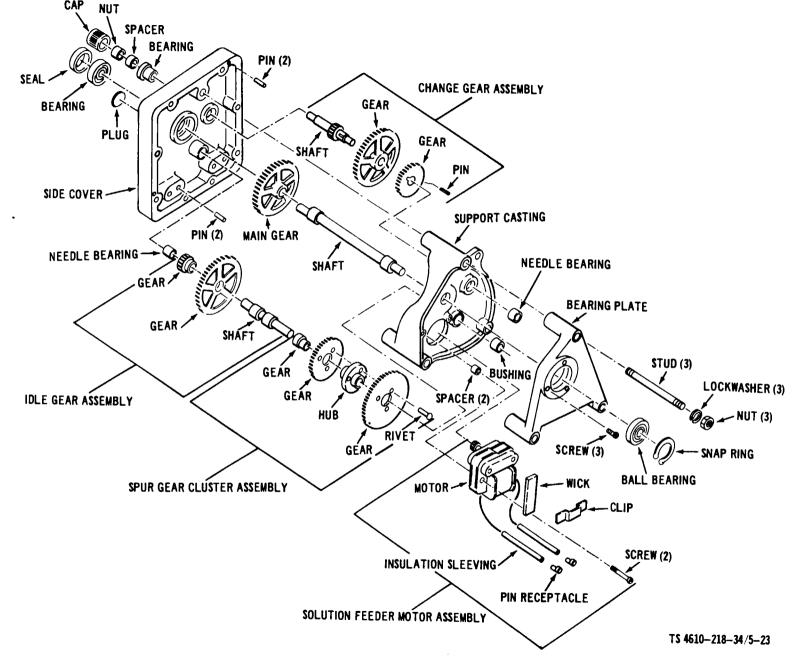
Chemical Solution Feeder Gear Unit, Disassembly and Reassembly
